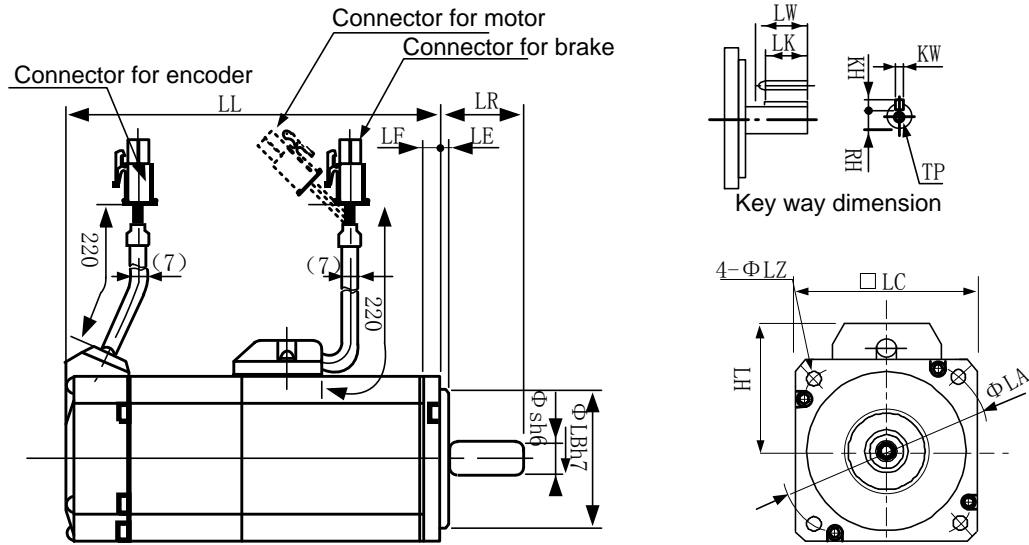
Dimensional drawing of MHMD/MHMJ series
